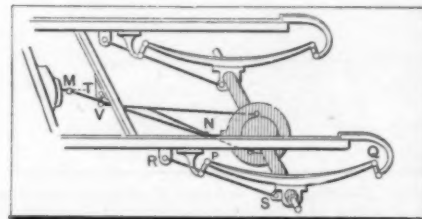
This type of chassis with two universal joints in the propeller shaft, two distance rods to take care of thrust, and a separate torque rod for the reaction of the couple is found in four types of chassis. It entails very careful fitting and a quantity of wearing parts
